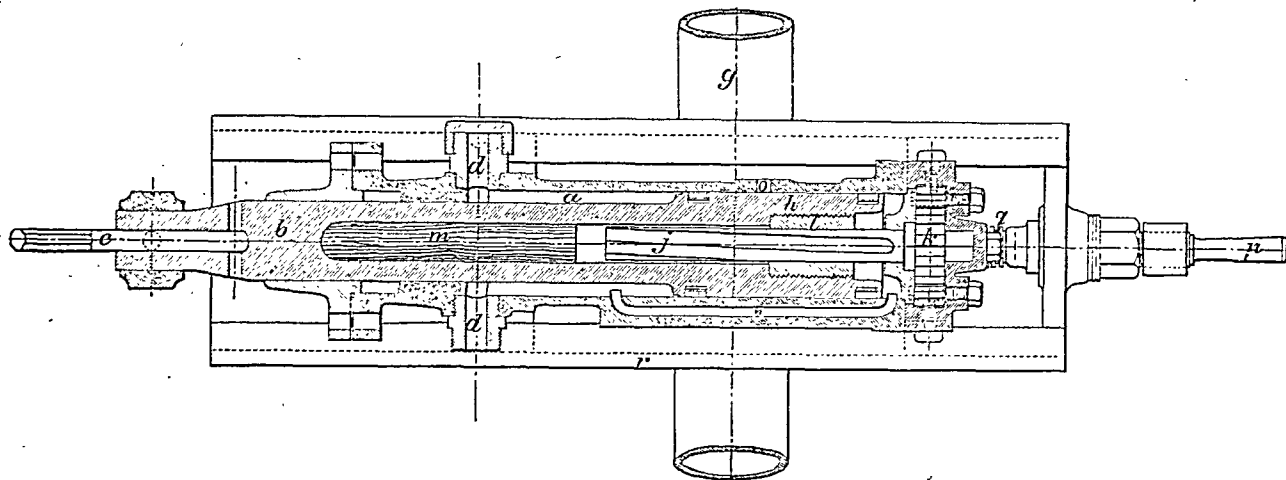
Horizontal Section of Darlington's Rock-Drill.—Scale $\frac{1}{16}$.
